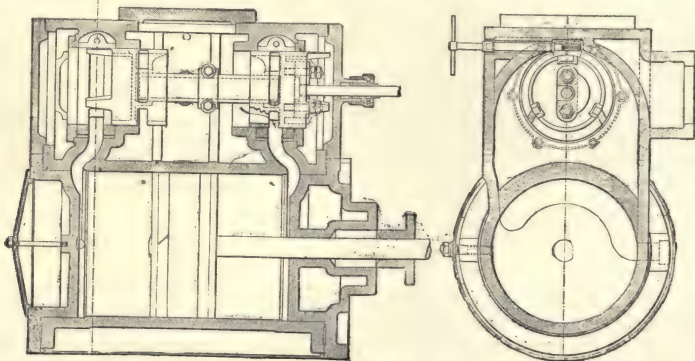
McIntosh and Seymour engine section—valve and cylinder.
